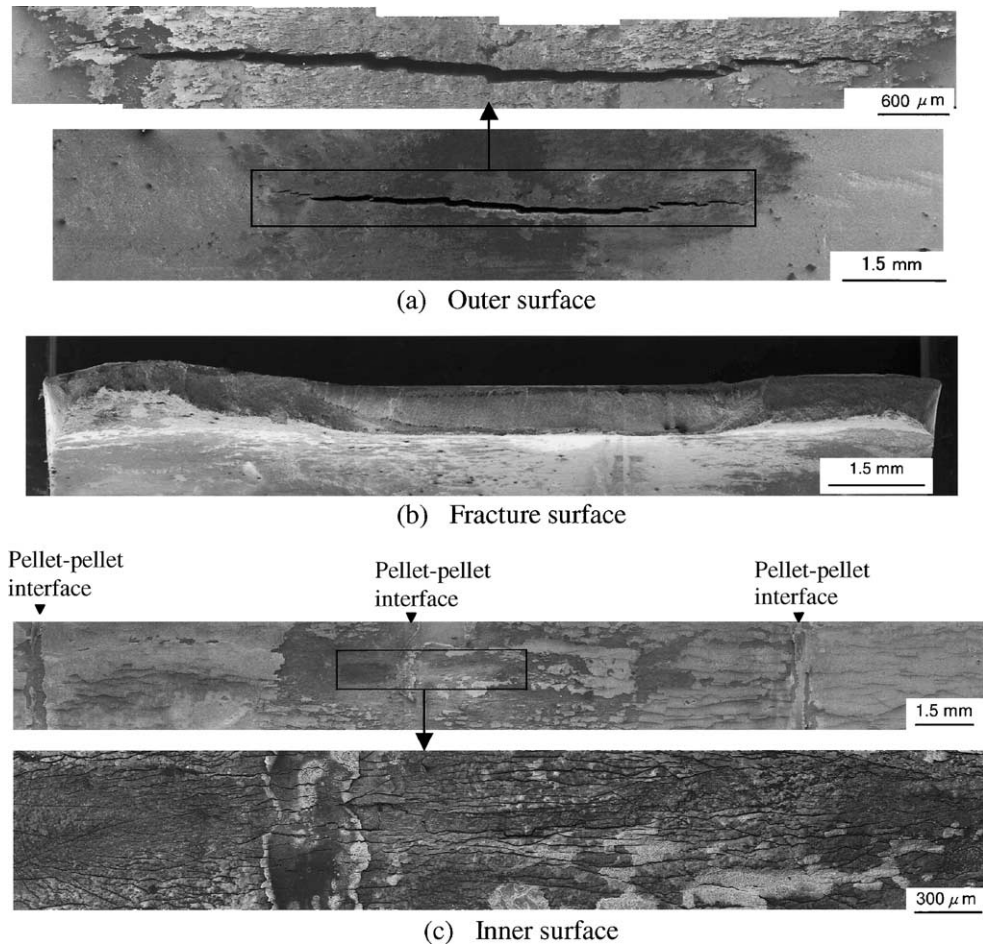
Overview images of outer, fracture and inner surfaces of crack in P2(D4/F3-5) segment rod.
